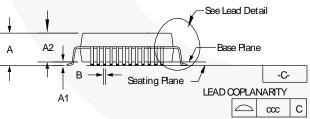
48-Contact Leadless Quad Flat Package (LMQFP)
